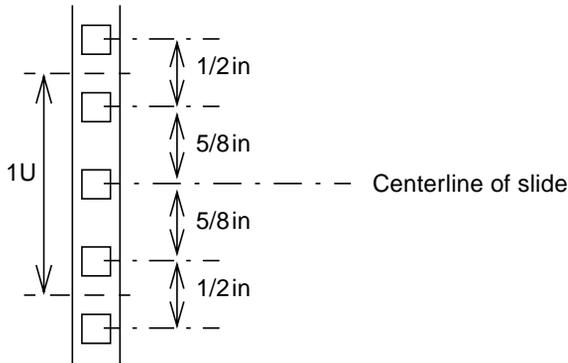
EIA/RETMA Universal Mounting Hole Pattern Dimensions
